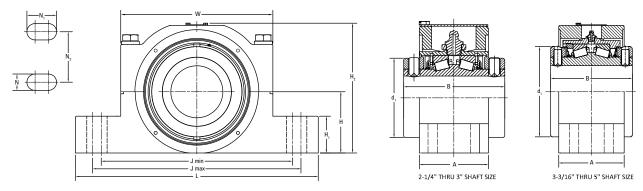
Type E Self-Aligning Mounted Tapered Roller Bearing nomenclature.
